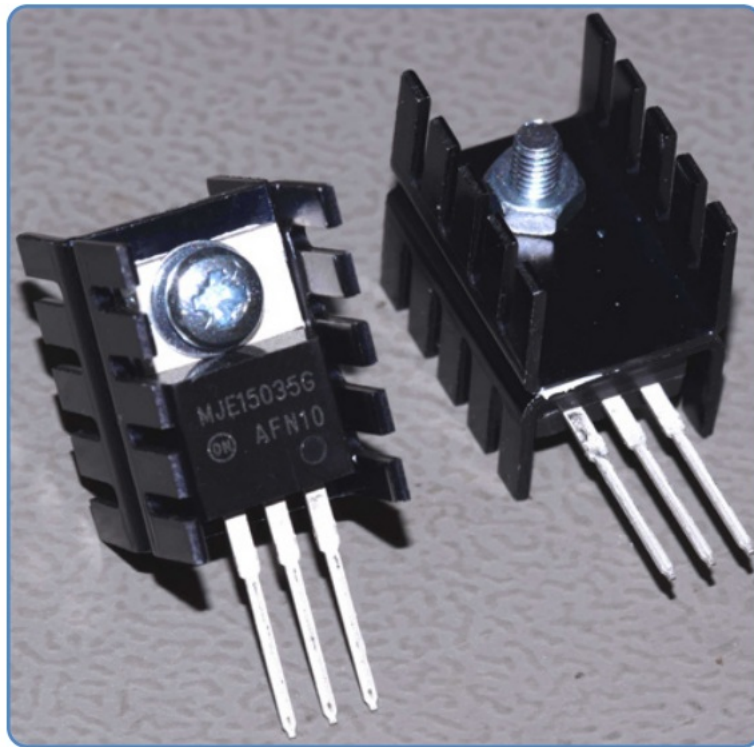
TO220 transistors T4 and T10 attached to a pair of mini heatsinks. For each power transistor, refer to the BoM and the PCB overlay to make absolutely sure the device goes into the correct PCB position. Now solder the last two transistors T4 and T10, and the vertically mounted 5-watt resistors R11, R12, R13, R29, R30, and R31.
